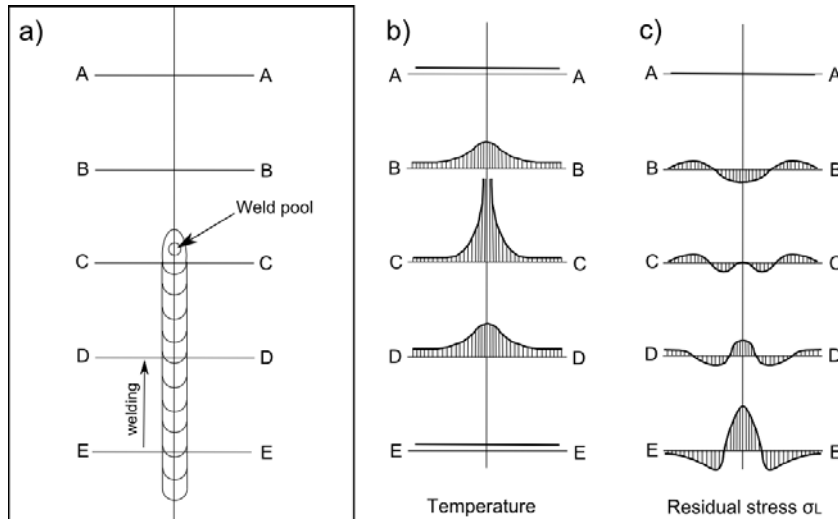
Development of longitudinal RS during welding: (a) Schematic snap-shot of the moving weld tool and cross trajectories as a function of distance from the weld tool representing different welding states, (b) Schematic of the welding temperature and (c) the current RS distribution for each state of welding (after Masubuchi 1980).
